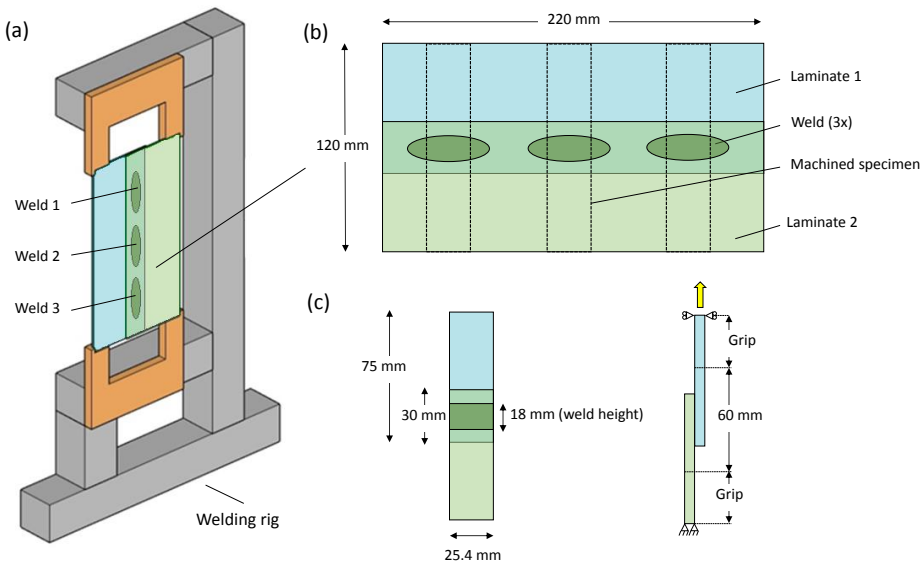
Welding of single lap shear specimens: a) Conduction welding rig; b) Details of welded laminates, c) Single lap shear specimen.
